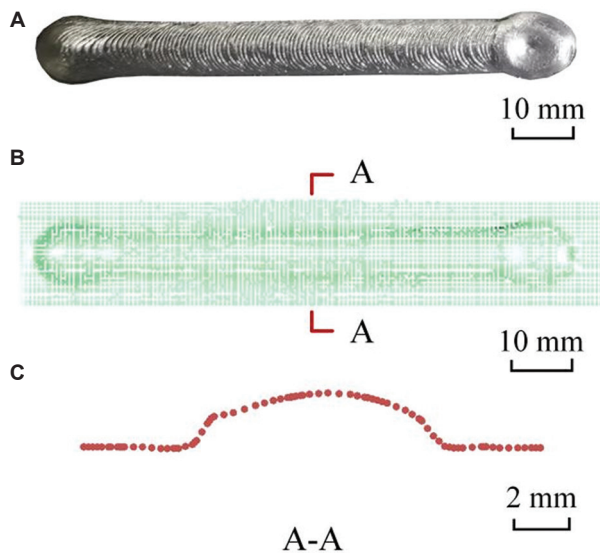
Schematic diagram shows the quantification of weld-bead width and height. (A) Actual morphology of a weld bead in the training set. (B) 3D point cloud obtained through line-laser scanning. (C) Extracted weld-bead contour
